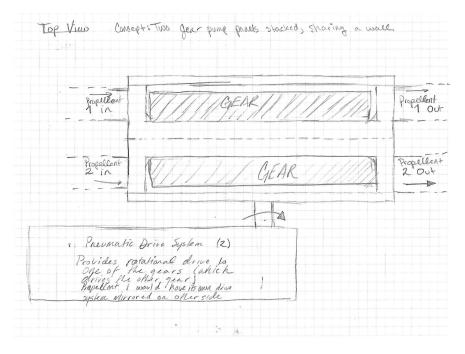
Idea 1 Side View - This shows two external gear pumps stacked opposing each other (so they can be driven from the outside) sharing a wall. A housing system will be designed to encase the pump and drive system. Wall thicknesses, gear size, and gear tooth amount will all depend on further pump and structure design.
